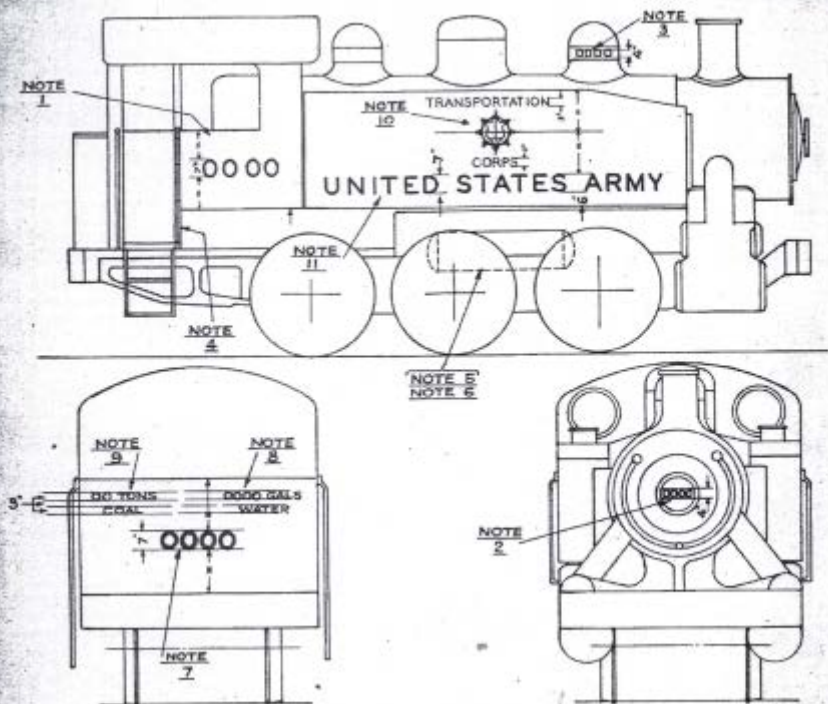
Standard markings for steam locomotives with side and saddle tanks.
